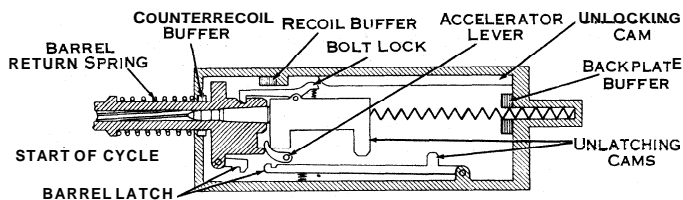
SCHEMATIC DRAWING OF SHORT RECOIL SYSTEM
